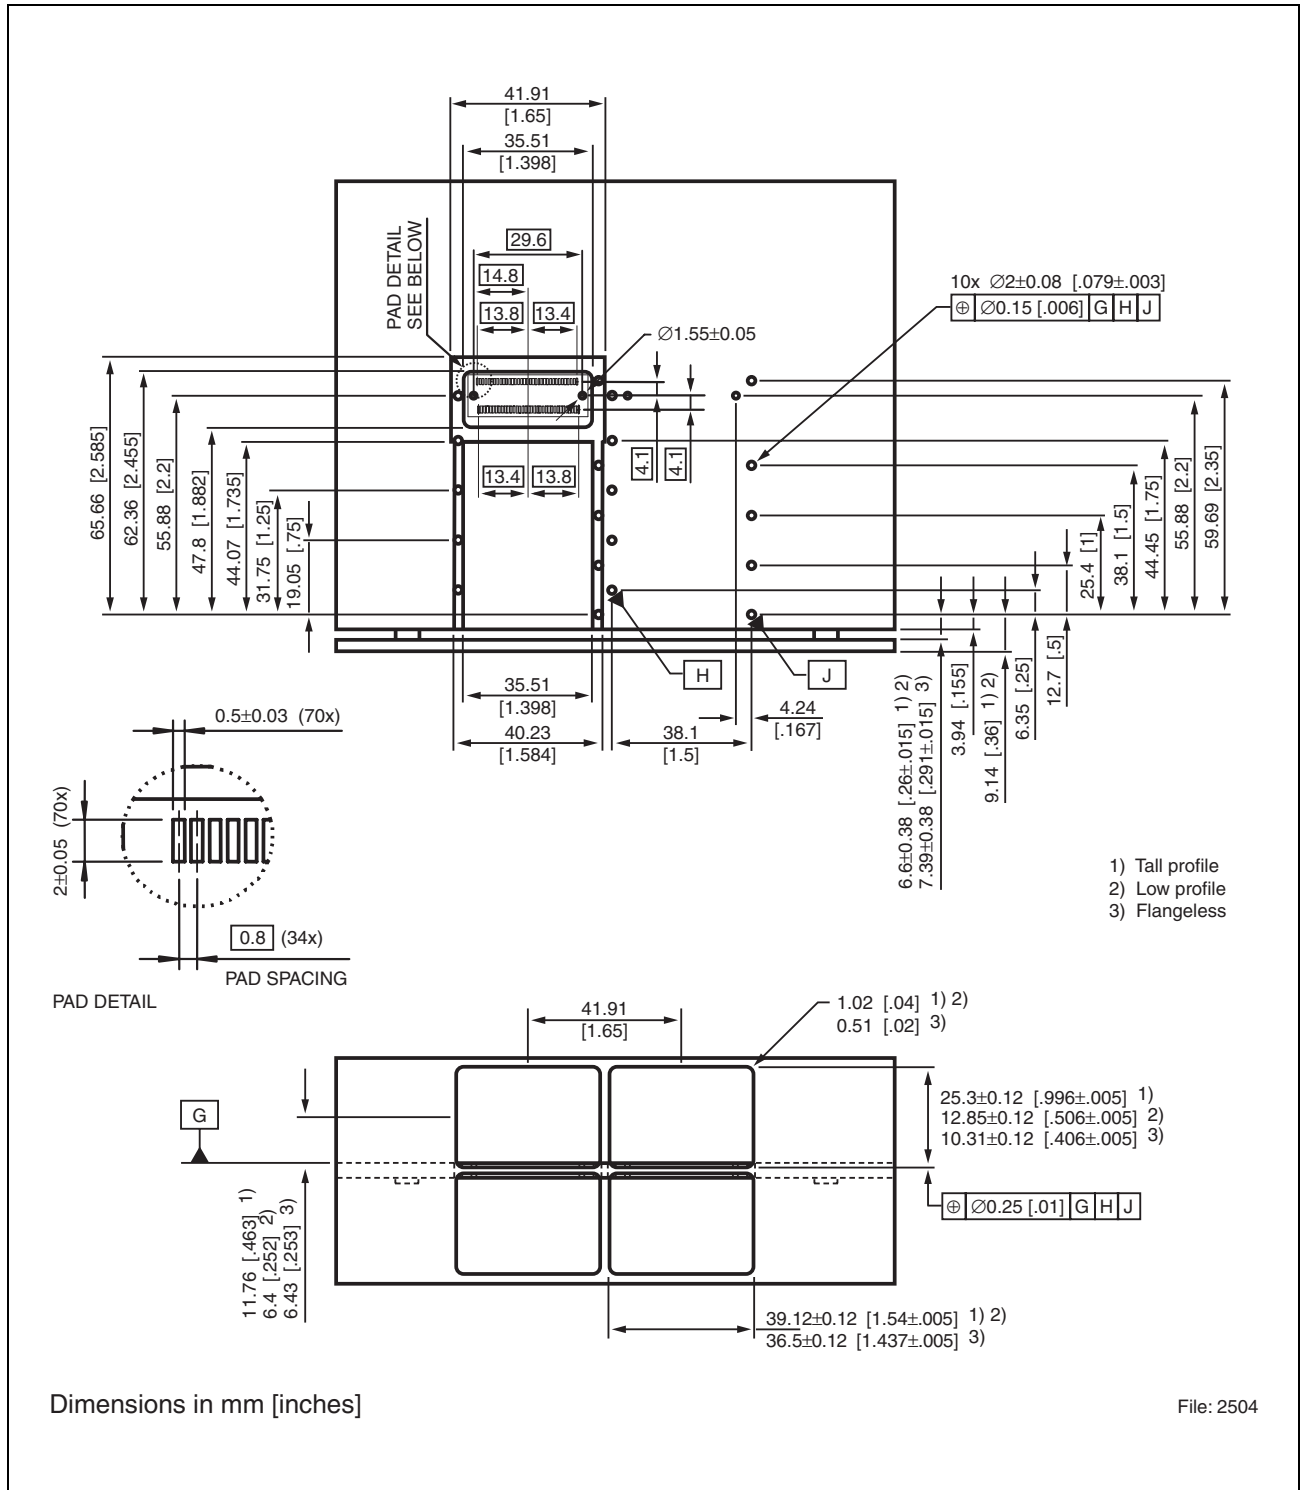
Host PCB, Board Connector Layout and Bezel Opening
